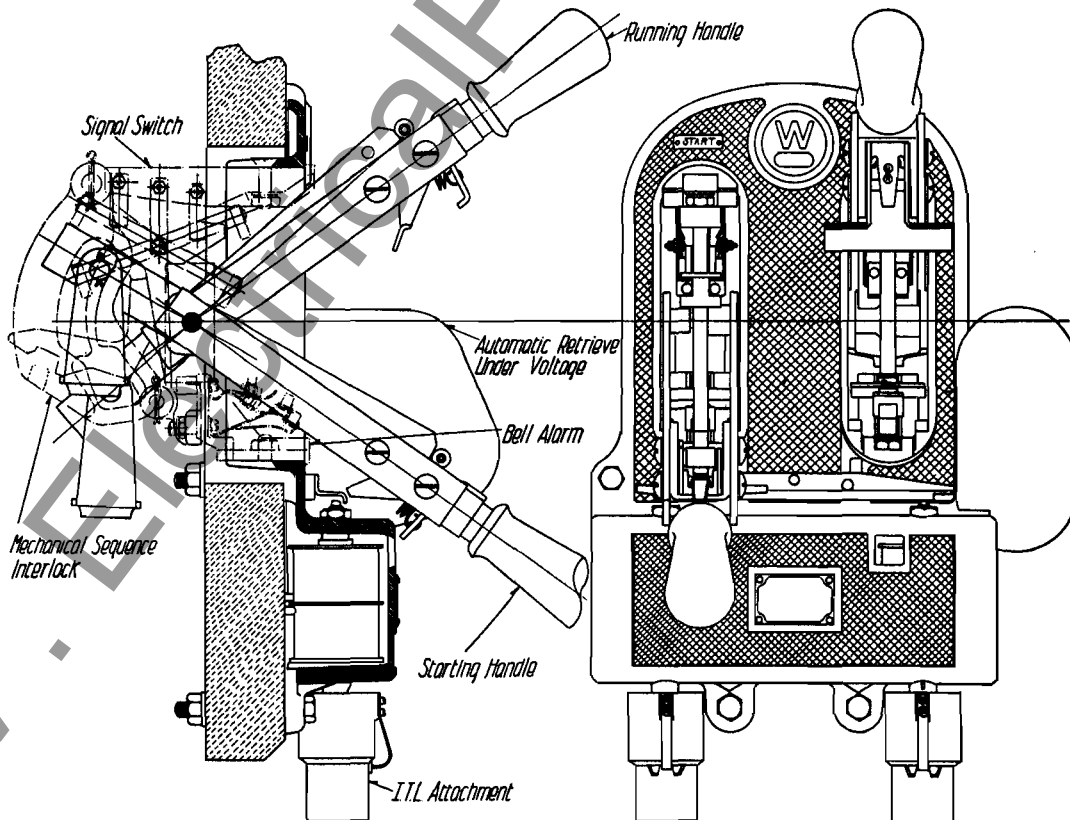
DOUBLE HANDLE COVERPLATE FOR MOTOR-STARTING EQUIPMENT
